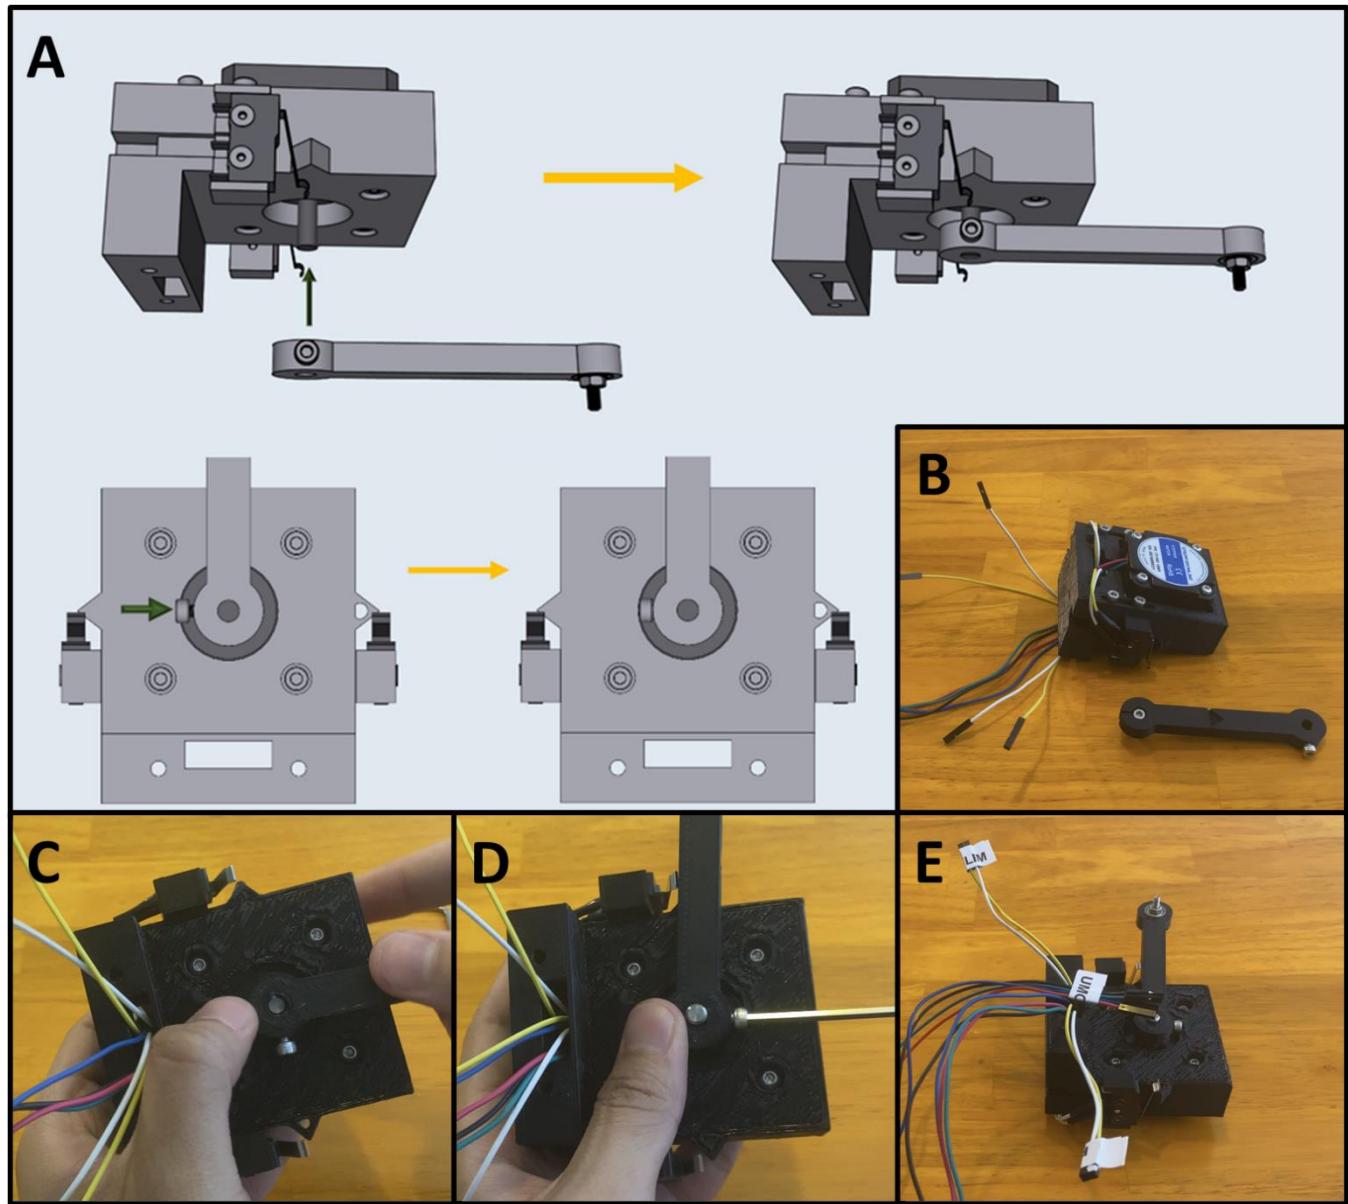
e: The procedure for attaching Arm One onto the Upper Motor Assembly.
